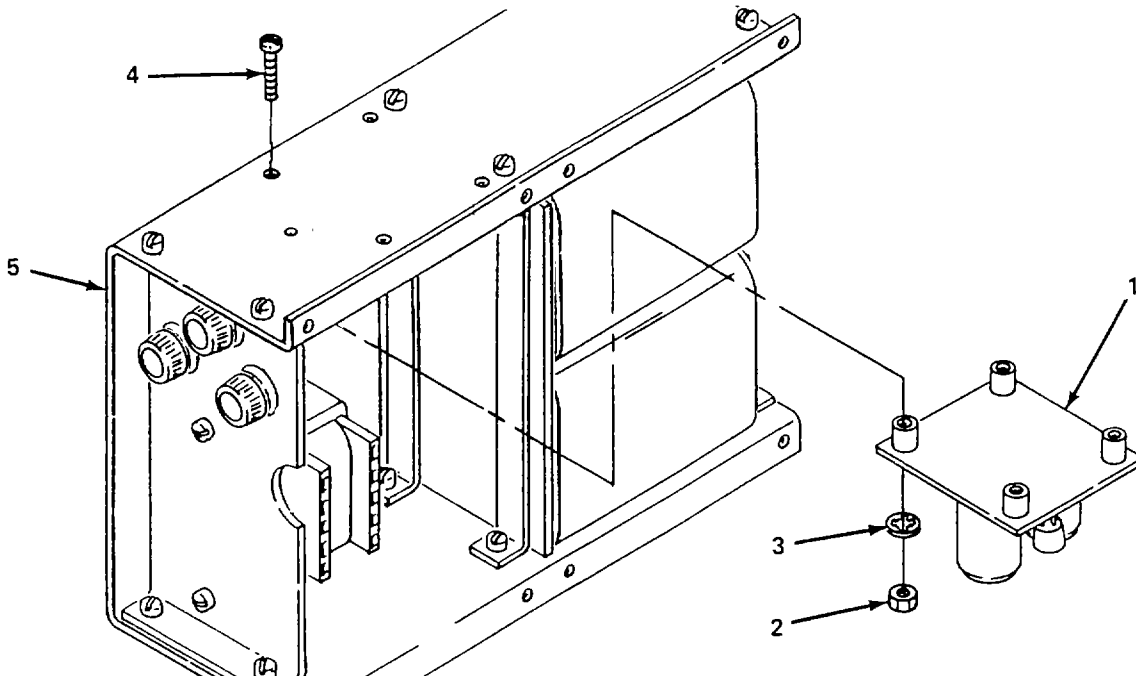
Battery Card and Case Battery Charger P. C. Card Assembly, Replace.
